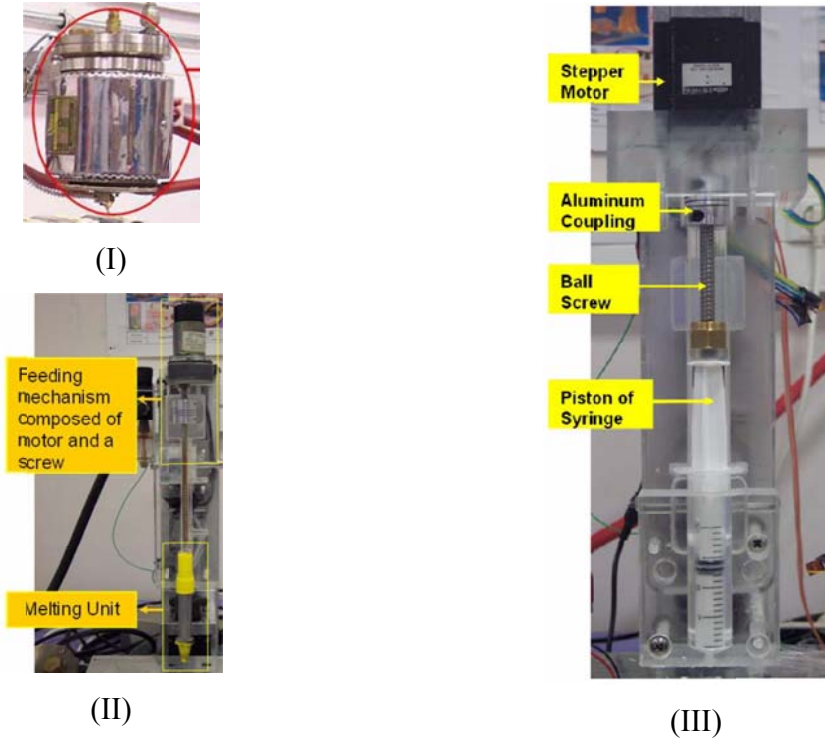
(I,II,III) The former designed four different type of extrusion head
